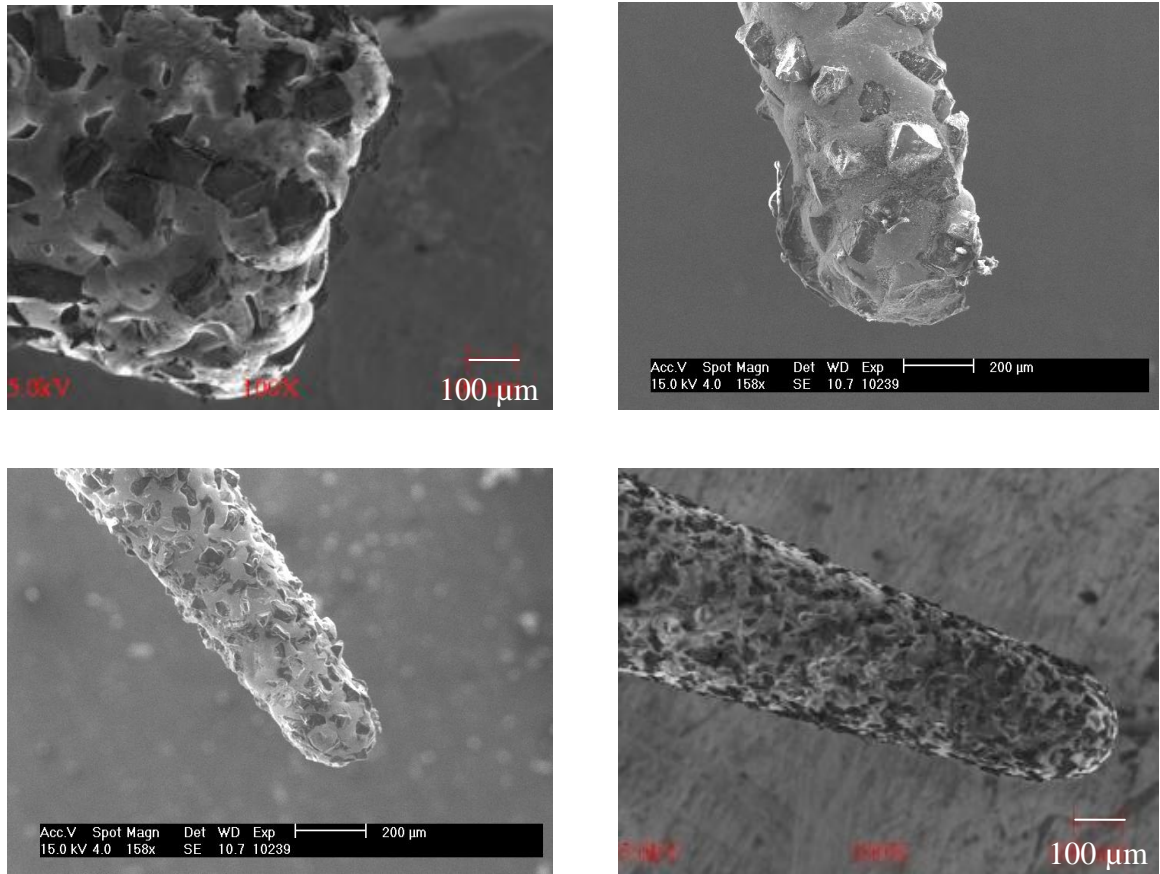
SEM images of the cylindrical tool (a) and cone shaped tools with medium (b), fine (c) and superfine grits (d) (manufactured by Strauss Diamond)
